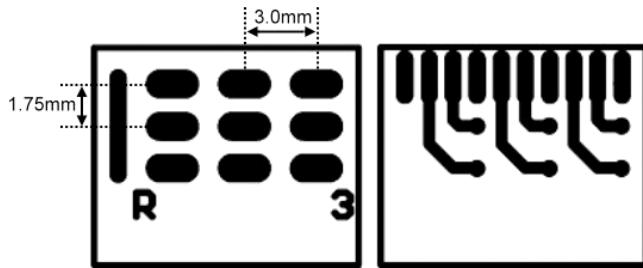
Top and bottom layers of PCB with completed layout. Left-hand picture displays the top layer that forms the front of PCB pattern. The right-hand picture presents the bottom layer, which constitutes the back of the PCB pattern.
